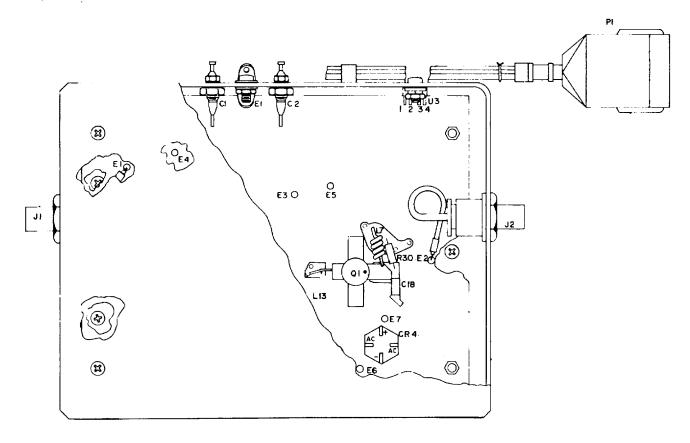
Modulation Eliminator, 1A5A5 Parts Location Diagram
